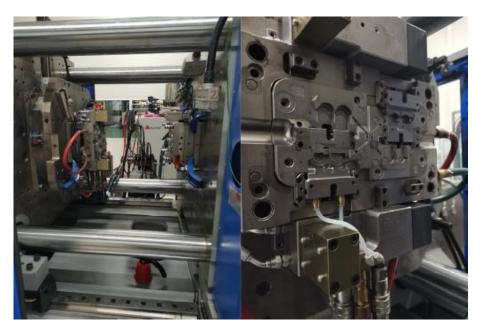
(left) injection mould machine with mould assembled; (right) detail of the mould cavity showing the L-PBF insert with cooling inlets attached.
